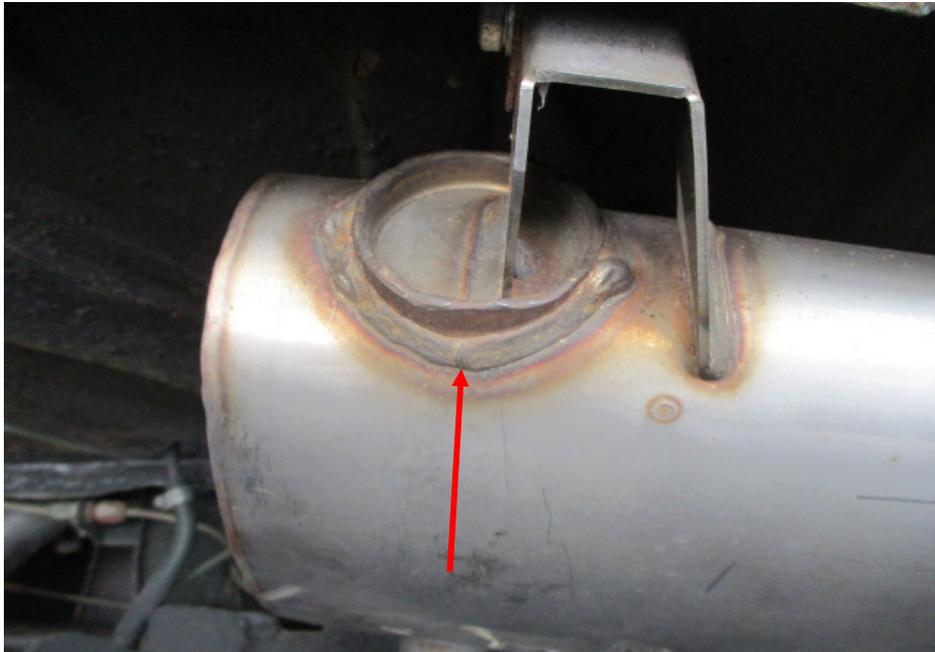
shows the opening on the side surface of the rear exhaust muffler, facing the rear of the Motor Car. The opening was observed to be sealed with welding marks (arrowed) surrounding the opening.
